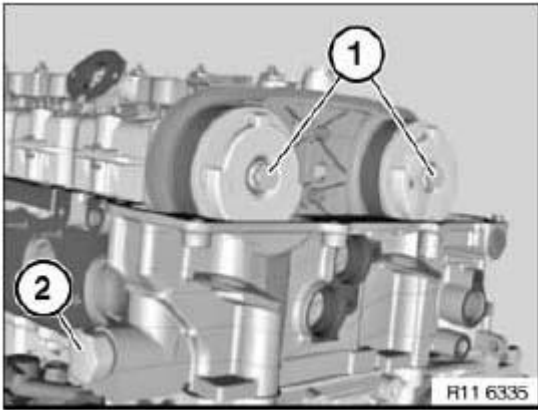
Identifying Engine Central Bolt And Chain Tensioner
